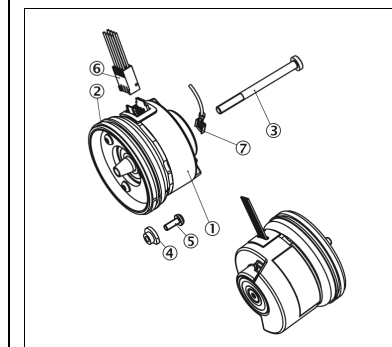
Assembly figure of SRS50S/SRM50S, conical shaft, resolver support
